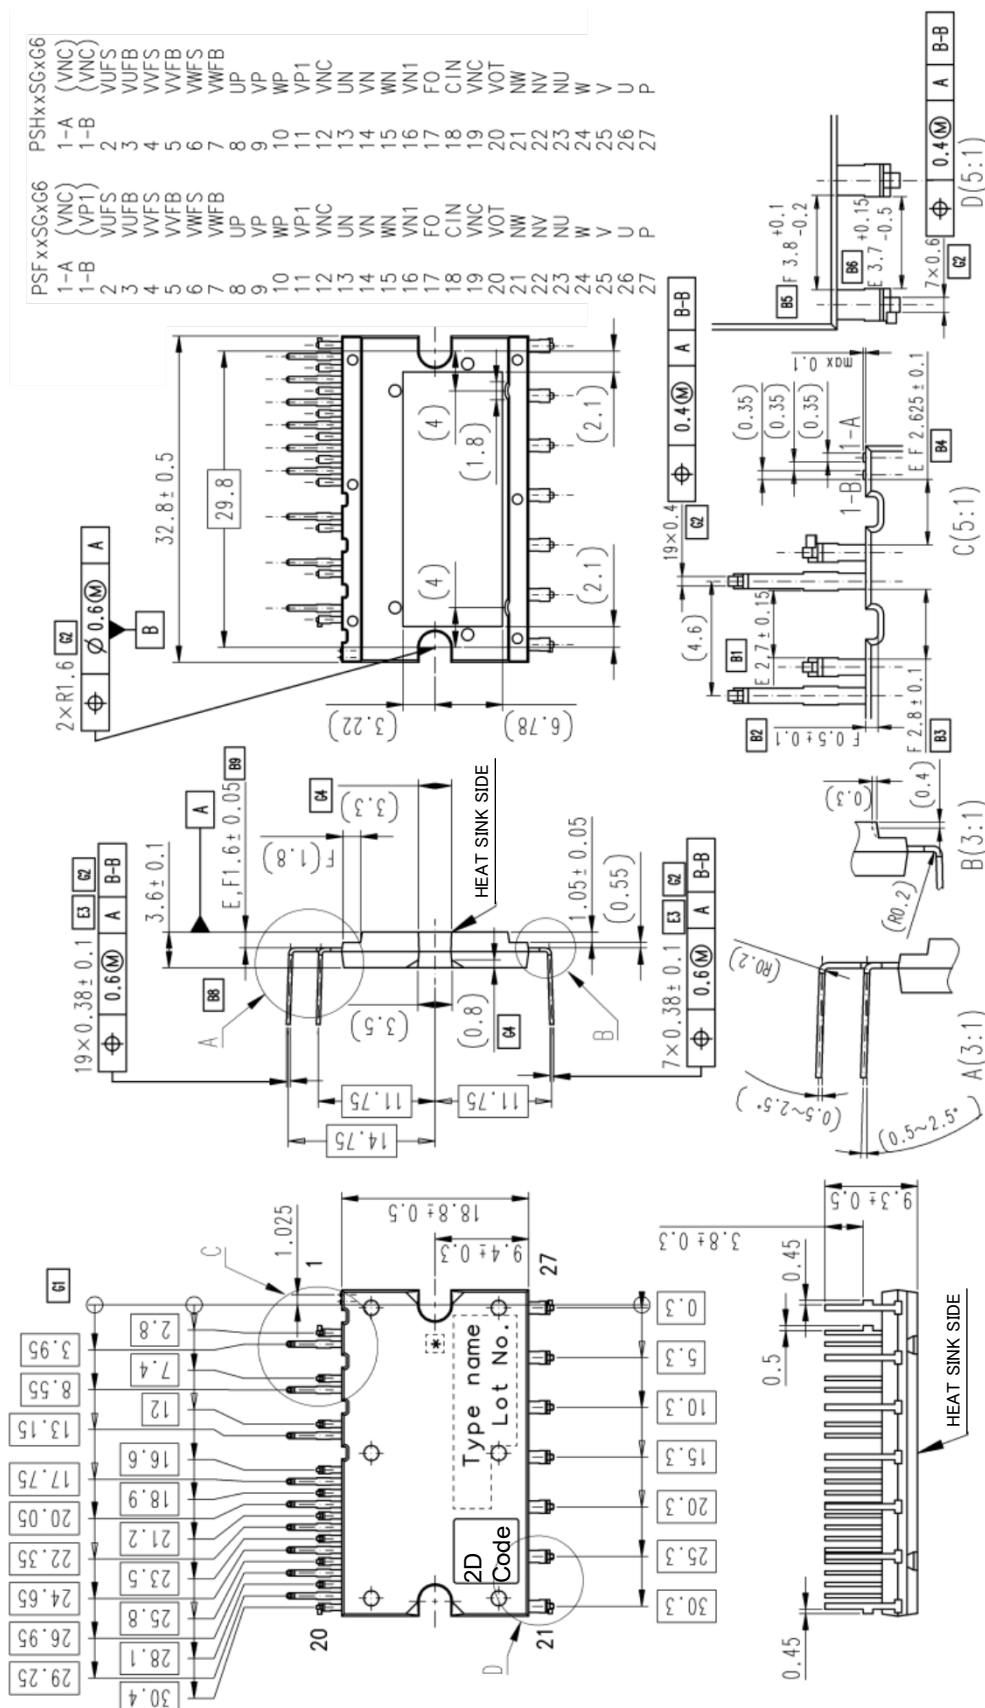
Package outline drawing with short terminal length (Dimension in mm)
